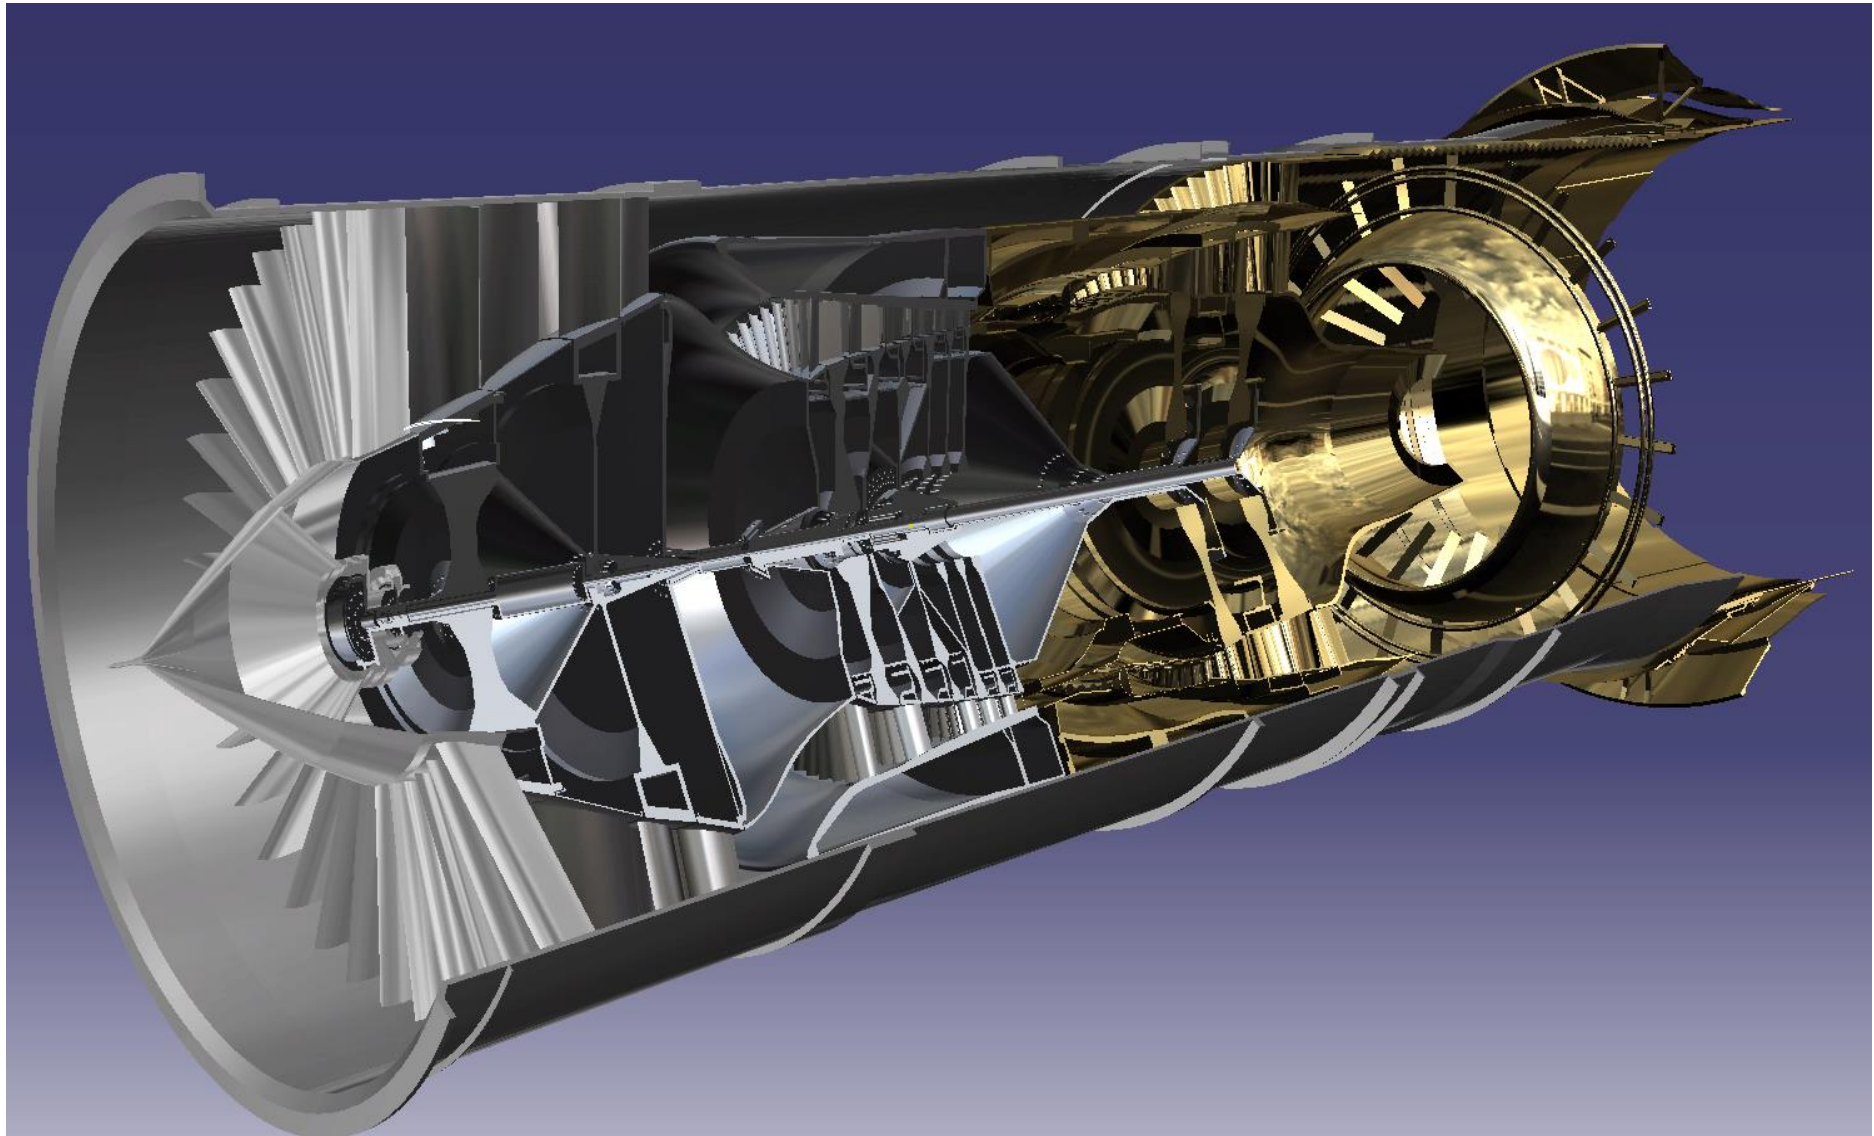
BeEngine 3D Technical Drawing (Nozzle is on wet contition)
